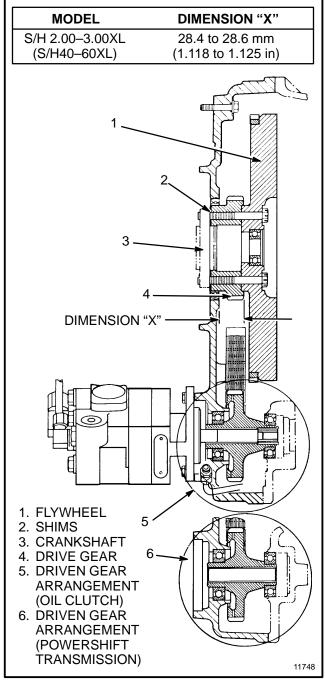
FLYWHEEL ARRANGEMENT WITH HYDRAULIC PUMP DRIVE ASSEMBLY
